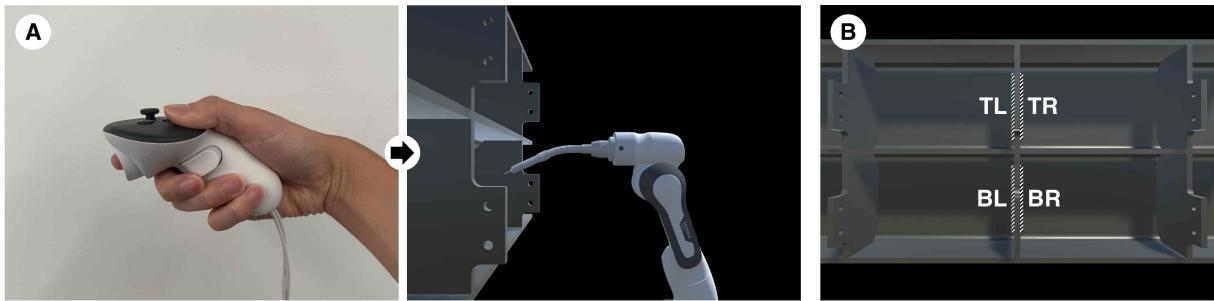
(A) Side view of the VR controller held in a user's hand (Left) and its direct mapping to the robot's end effector in the VR interface (Right). (B) Four welding seam locations in the virtual task scenario. TL = Top left, TR = Top right, BL = Bottom left, and BR = Bottom right.
